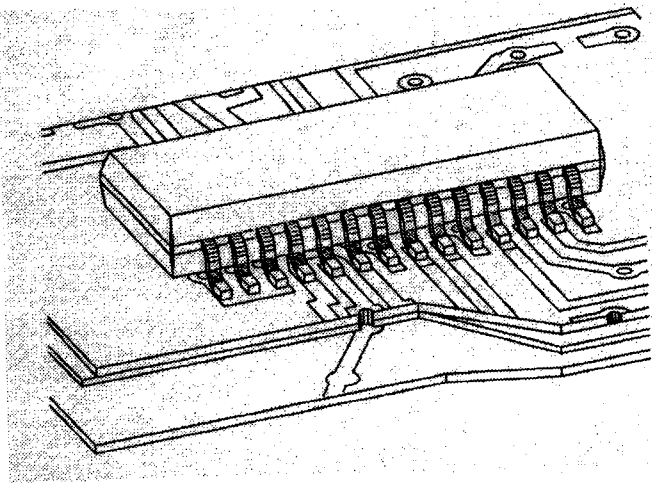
SSOP 28 lead package on 4-layer FR-4 board.
